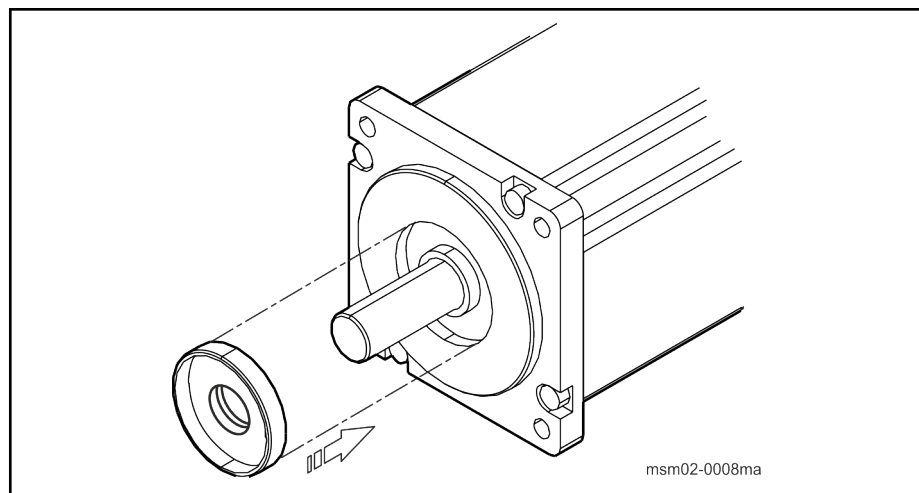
Mounting accessories radial shaft sealing ring MSM
